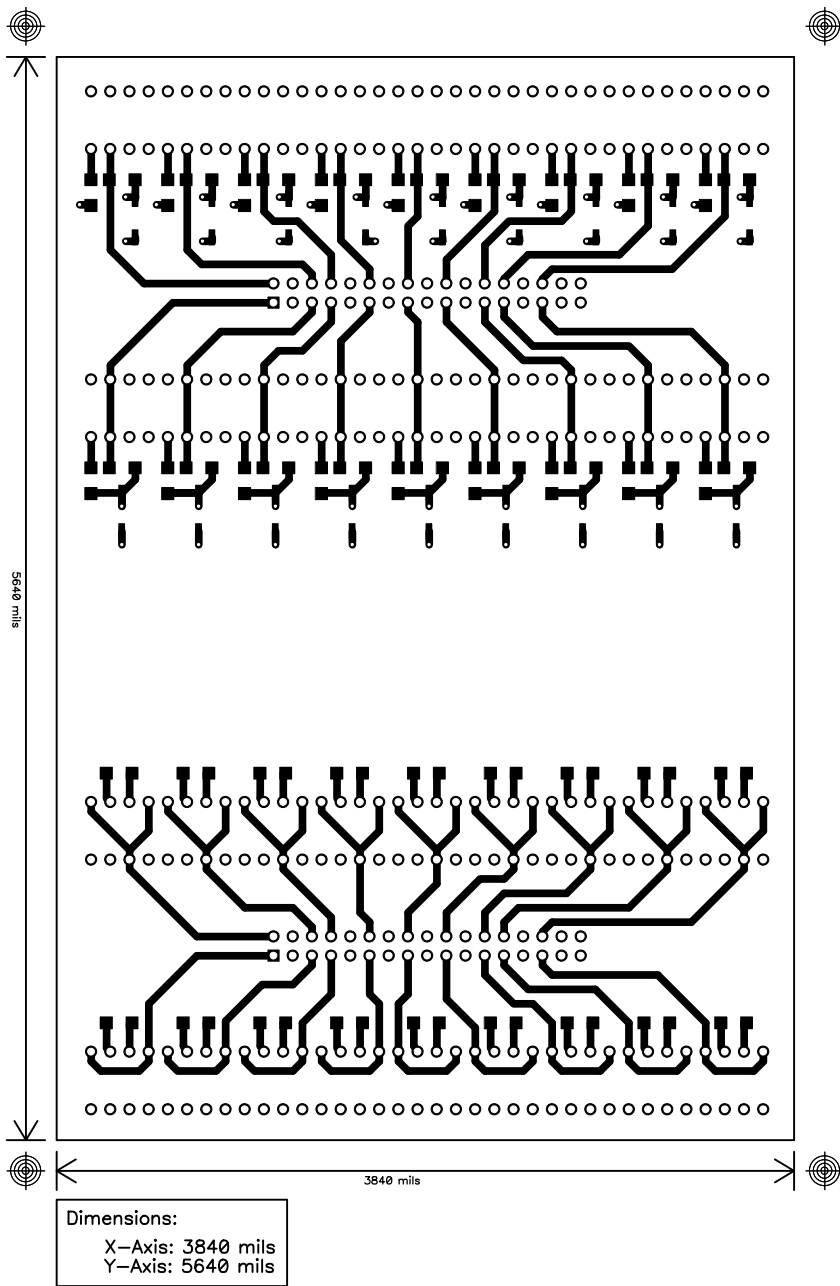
Printed Circuit Board Layout of the PEC33 POWER Layer
